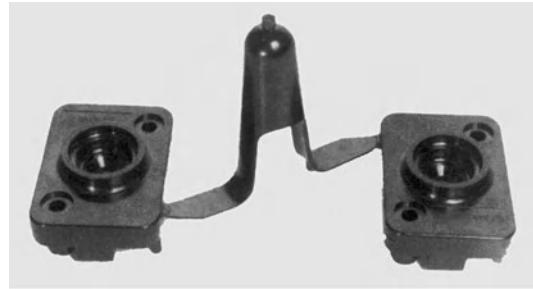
Injection-compression mold (Bakelite Common Pocket System)
